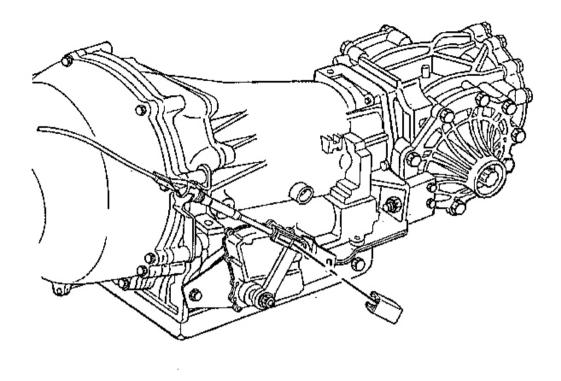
Transmission Shift Control Cable Courtesy of GENERAL MOTORS CORP.
